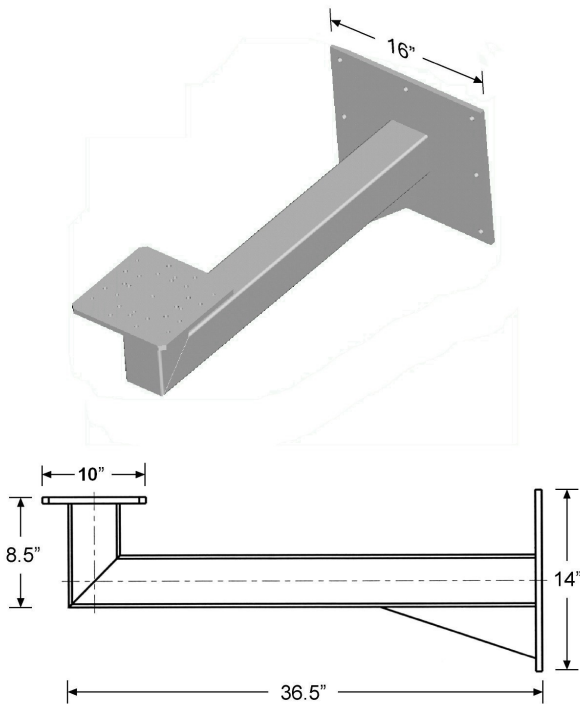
Extended Wall Mount – Used when a standard wall pedestal mount is insufficient to clear obstacles or for applications requiring an extension from the wall for better access to the transceiver.
